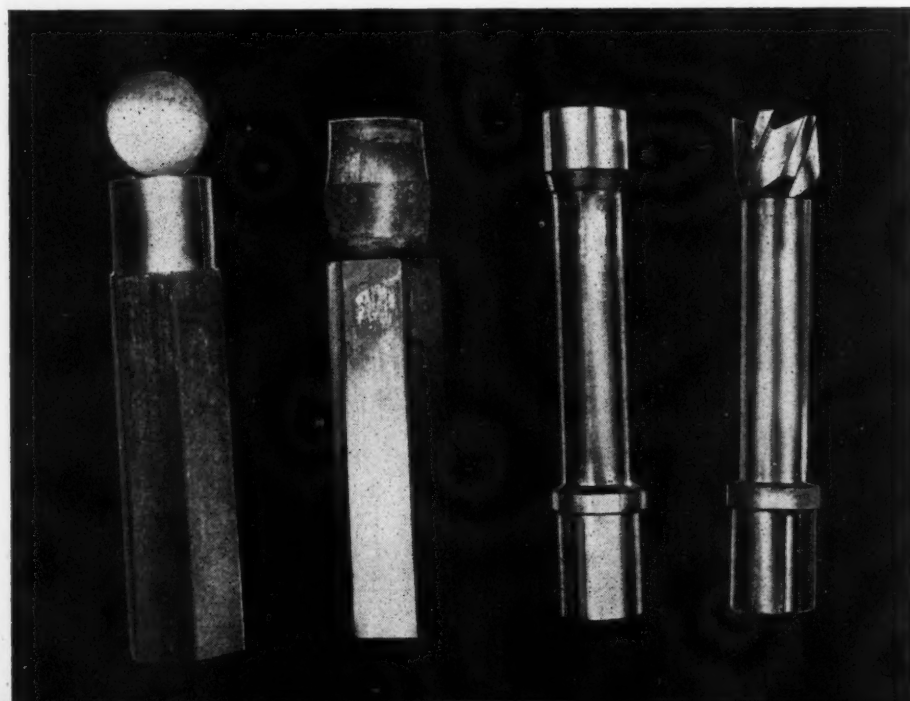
Successive Stages in the Making of Core Drills which Consist of a Piece of High-speed Steel Pressure Welded to a Shank of Low-carbon Steel
